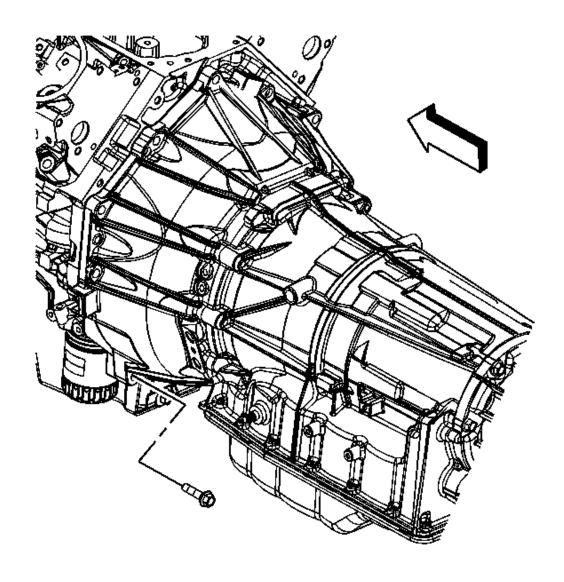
View Of Lower Transmission Bolt Courtesy of GENERAL MOTORS CORP.
